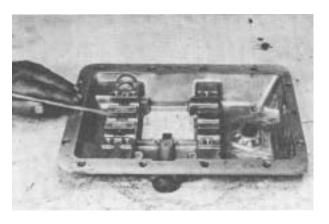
Position crossover interlock balls in cover cross bores. Two balls in cover cross bore between 1st & reverse rail groove, and 2nd & 3rd rail groove and two balls in cover cross bore between 2nd & 3rd rail groove, and 4th & 5th rail groove. (See cross-section illustration Figure 13-A).
